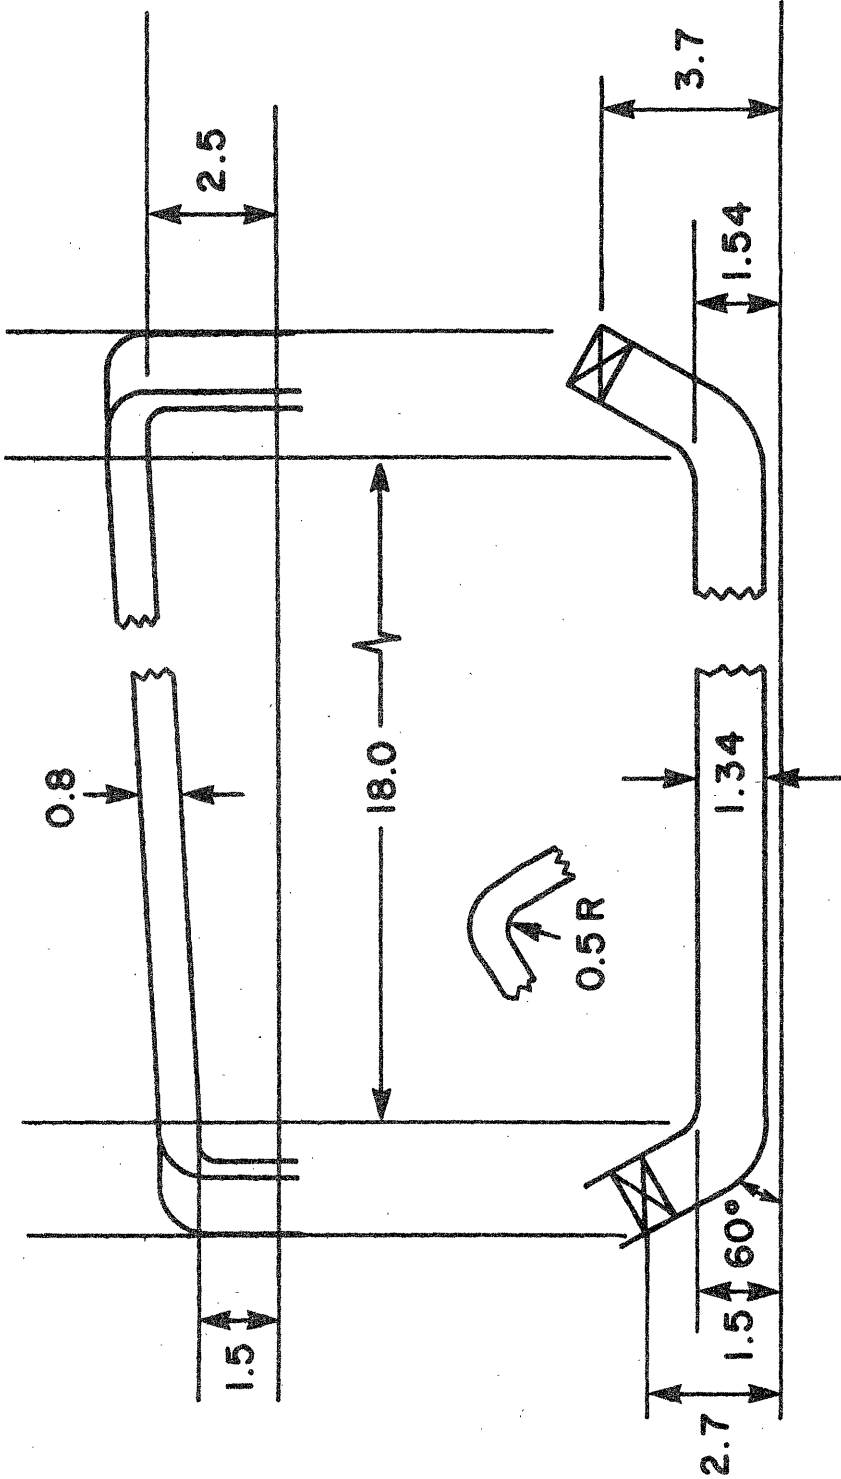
Sketches of typical winding cross sections, detail
